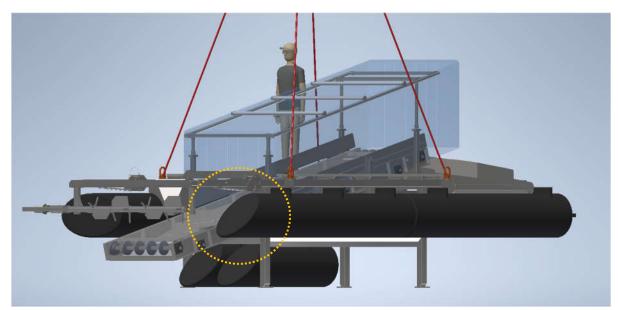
Angled view of BOWHEAD with outboard pontoon end circled.
